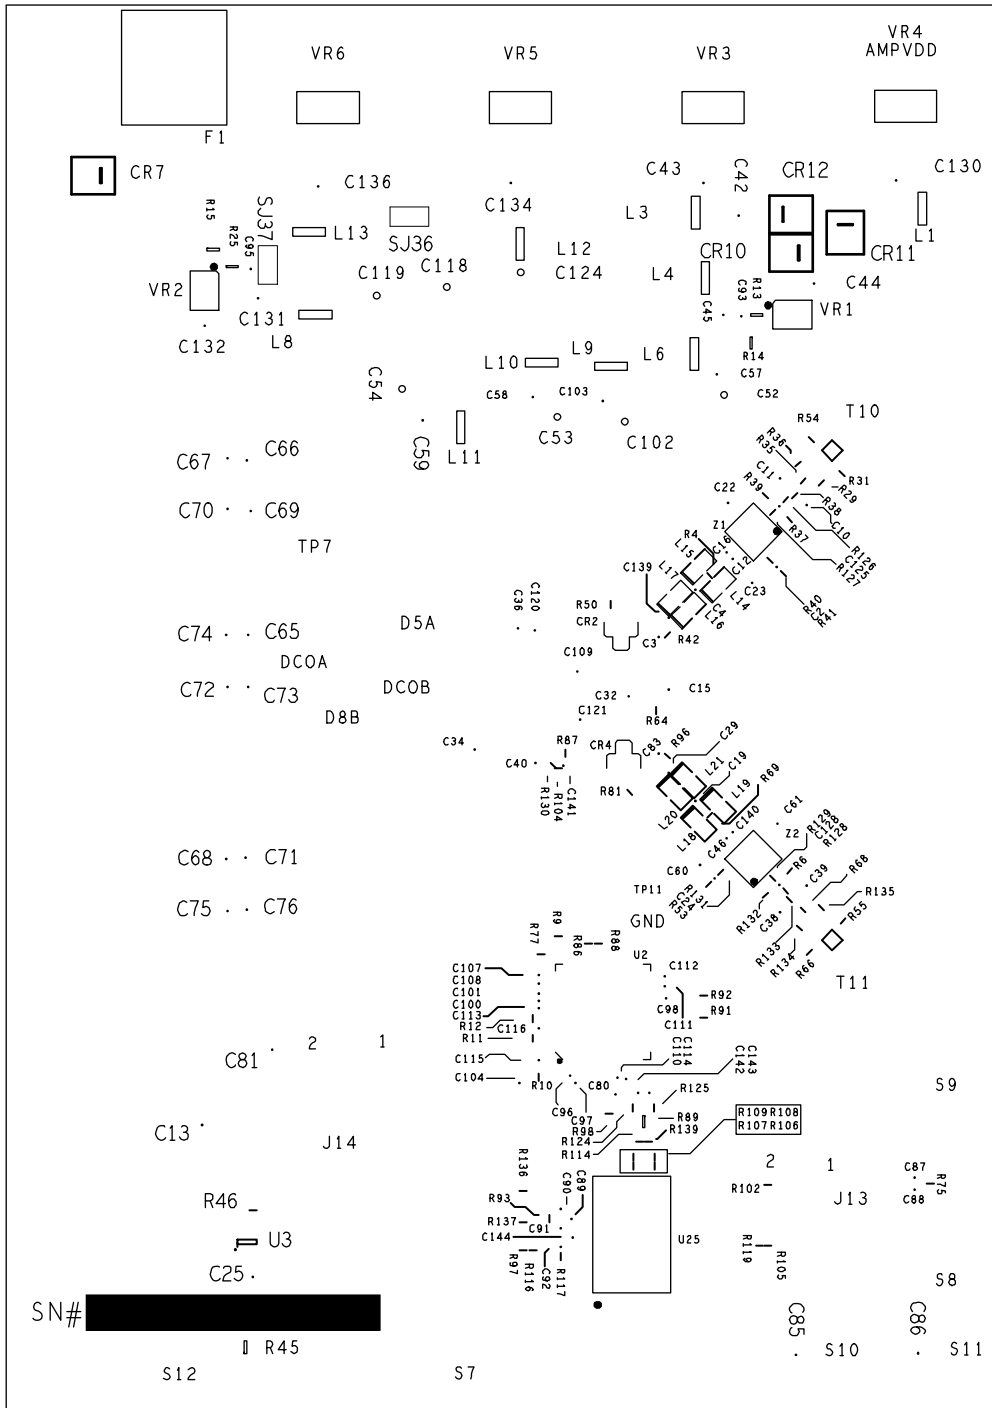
Evaluation Board Layout, Silk Screen, Secondary Side
